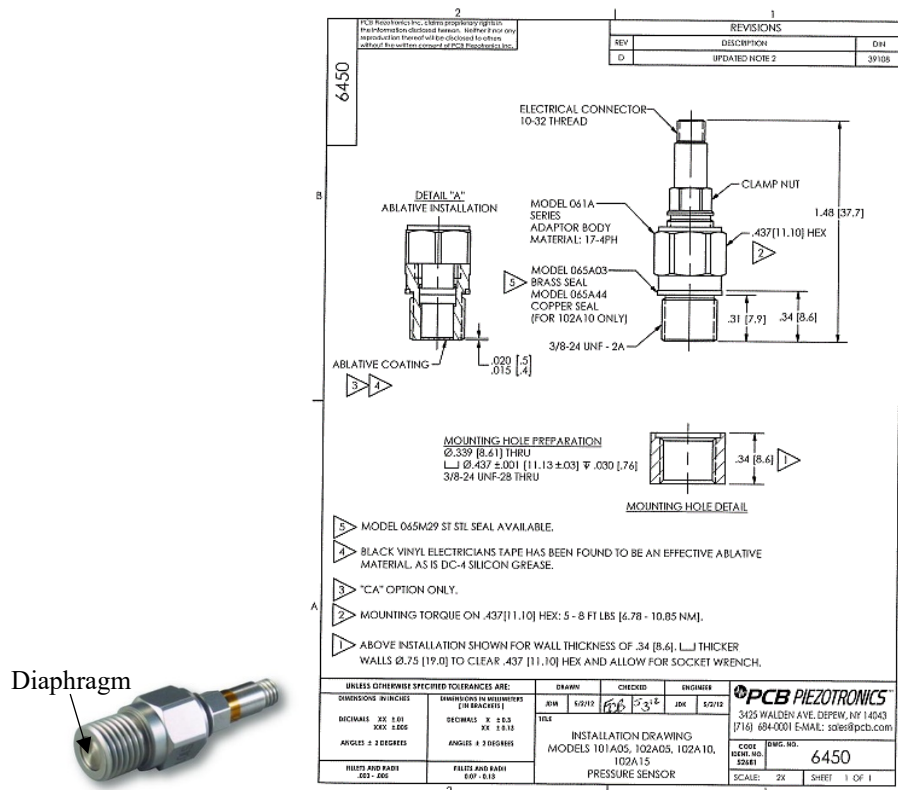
Example of a flush diaphragm pressure transducer. (Photograph and engineering drawing courtesy of PCB Piezotronics, Inc. Left: <https://www.pcb.com/products?m=102a05>. Right: PCB Piezotronics. Model 102A05 High Resolution ICP® pressure sensor, 100 psi, 50 mV/psi, 3/8-24 mtg thd, Installation and Operating Manual. https://www.pcb.com/spec_sheet.asp?m=102A05.)
